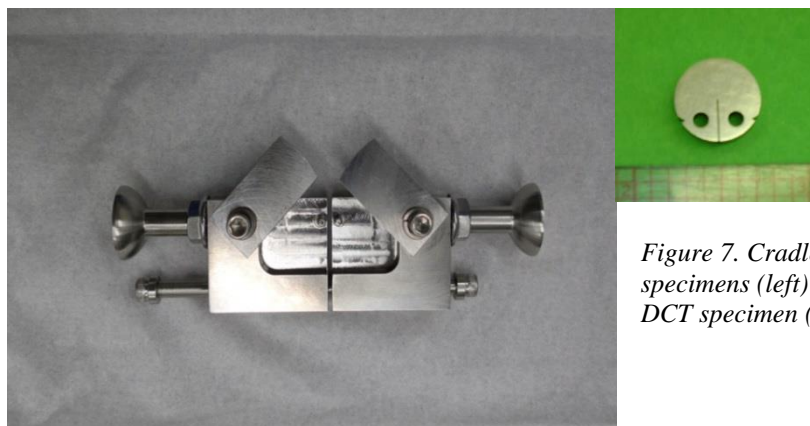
Cradle type fracture test grip for small DCT specimens (left) and a 4.7 mm thick 12.5 mm diameter DCT specimen (right).
